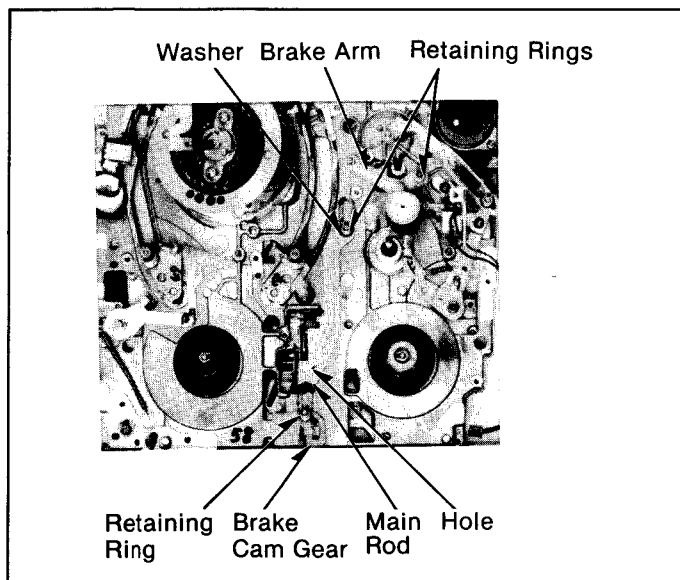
Assembly and Adjustment of Gears and Rod(8)
